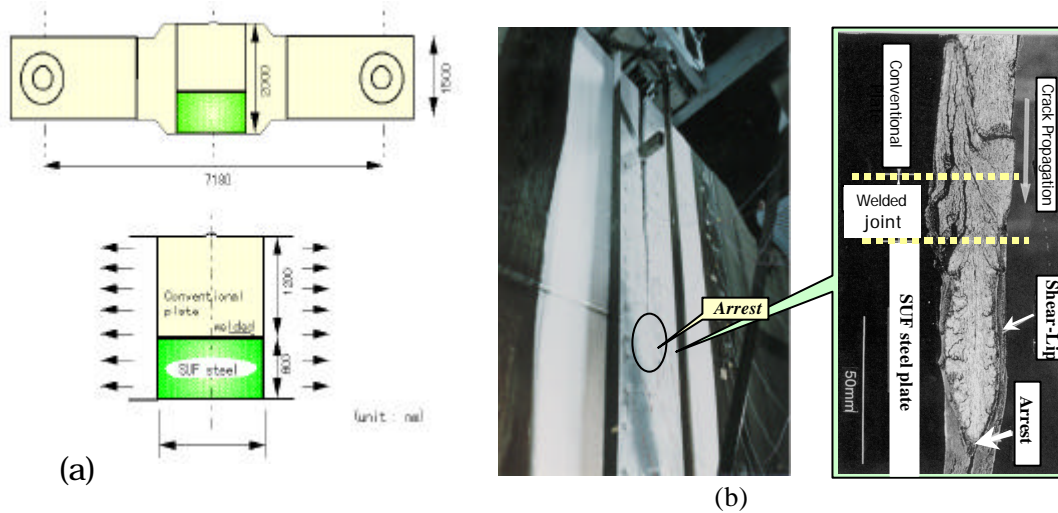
Ultra wide plate duplex ESSO test of SUF steel plate and its fracture surface.
